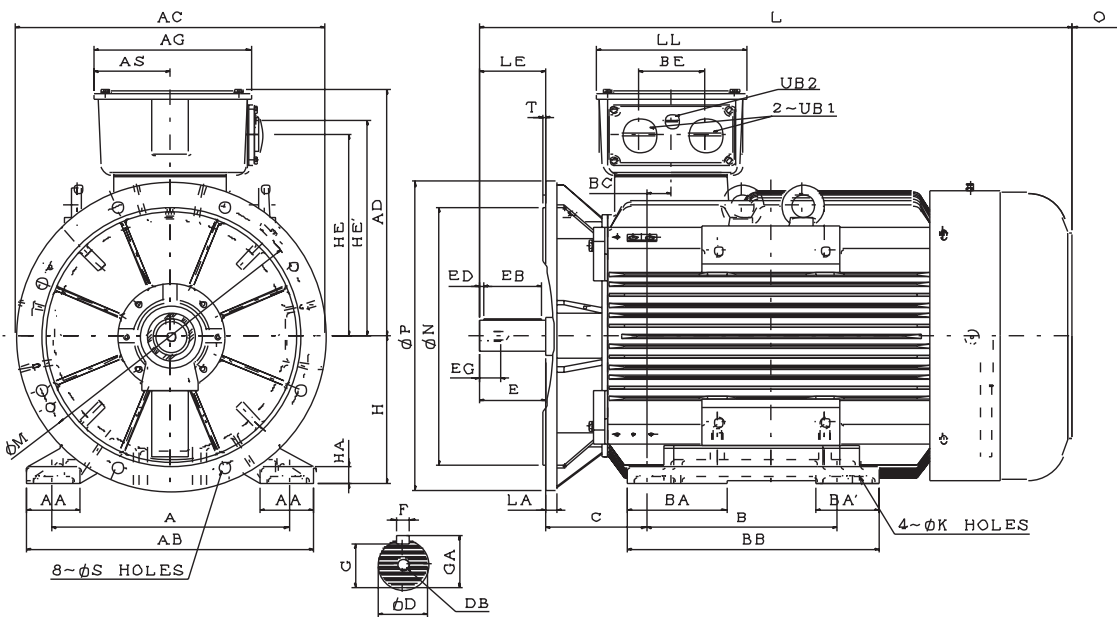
Outline drawing of cast iron design, feet version, mounting B35; frame size 315SA - 315MC
